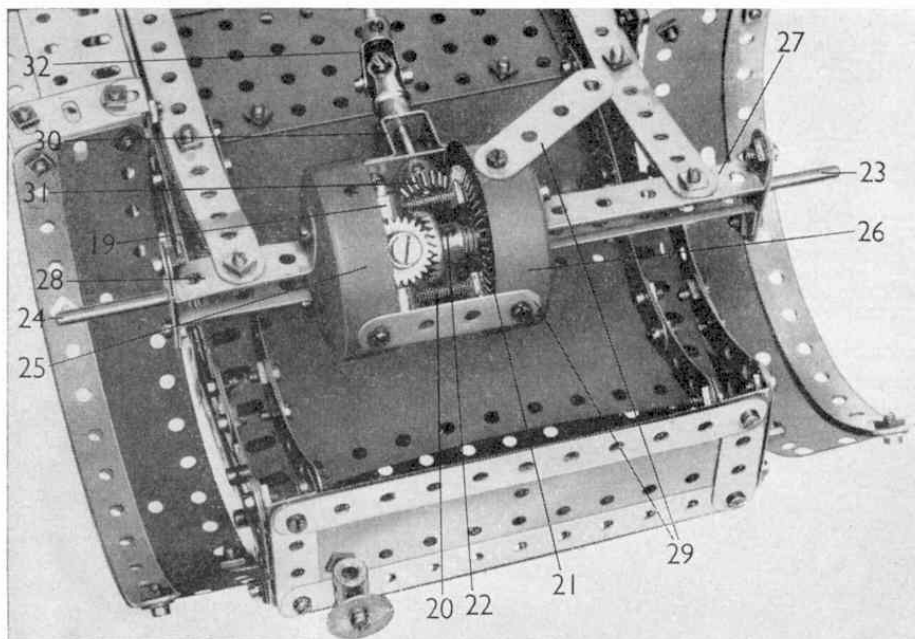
An underneath view of the rear end of the chassis, showing the back axle and differential.
